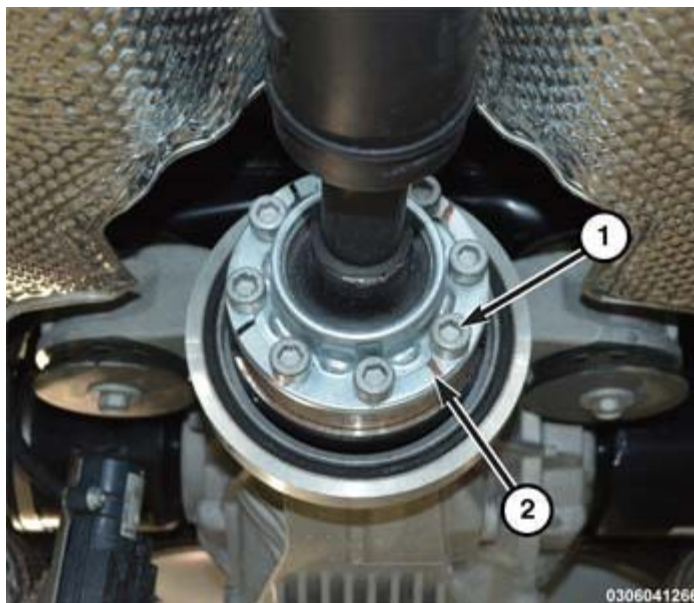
Drive Shaft To Axle Flange Bolts & Washers
